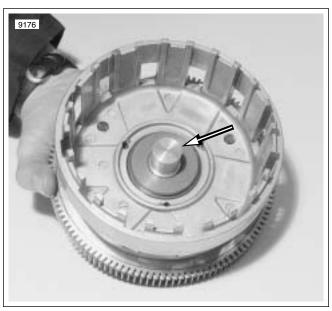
Clutch Disc Aligning Spacer (HD-45654)
